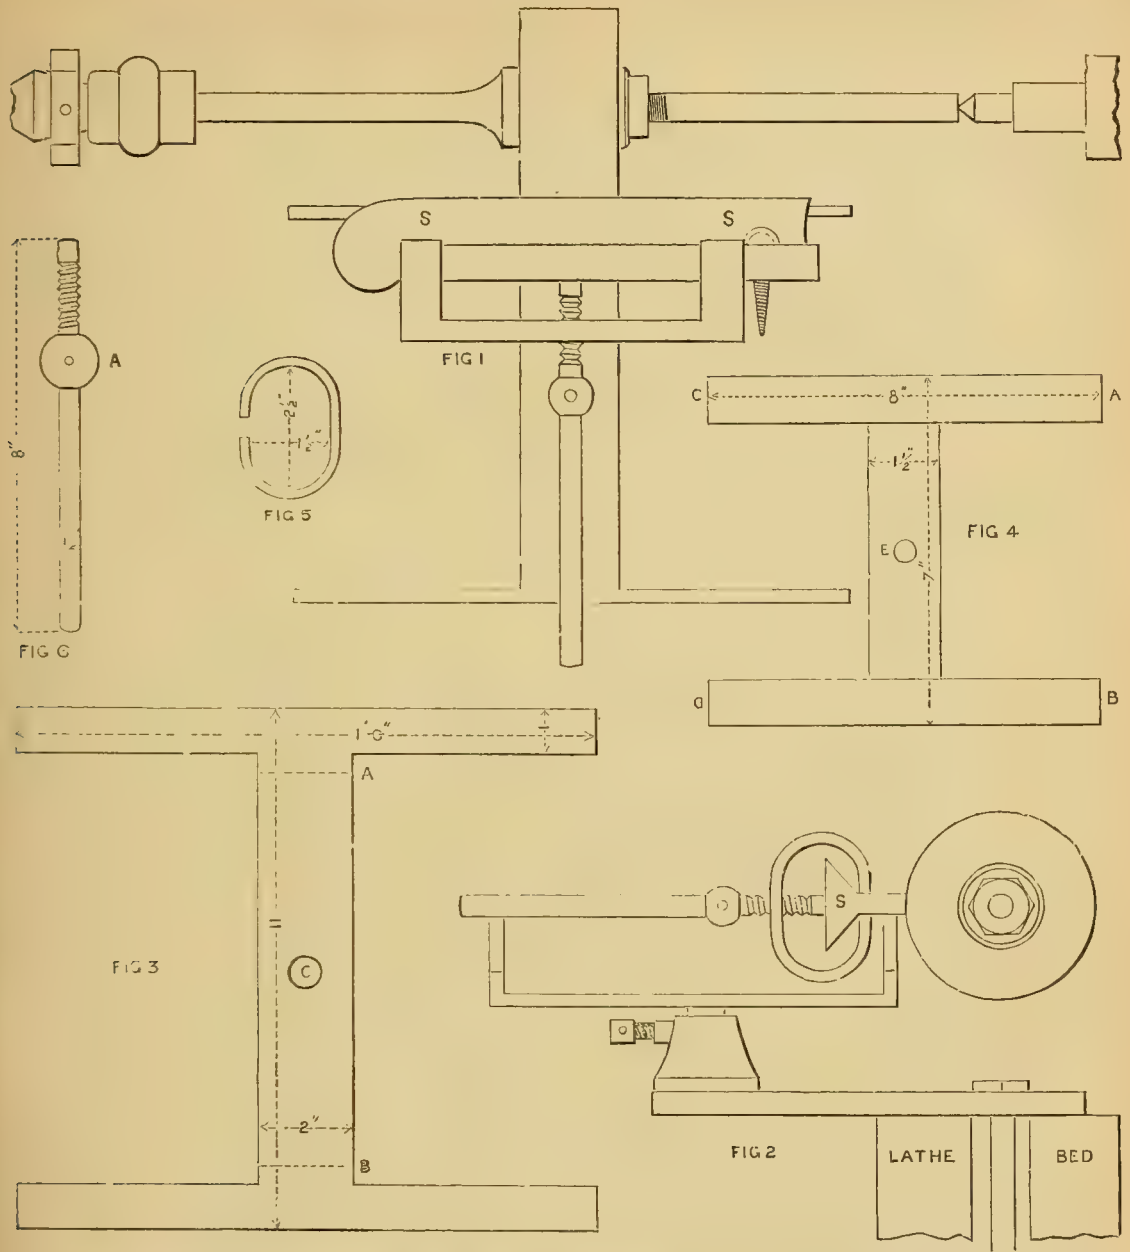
MODE OF MOUNTING EMERY WHEEL WITH SKATE, S, IN POSITION FOR GRINDING, SHOWN IN PLAN. FIG. 2.—SKATE ON LATHE IN POSITION FOR GRINDING, IN SIDE ELEVATION. FIG. 3.—4-PIECE OF IRON FORMING REST. FIG. 4.—H-PIECE TO FORM SKATE-HOLDER. FIG. 5.—FORM IN WHICH ARMS OF SKATE-HOLDER MUST BE BENT. FIG. 6.—LONG-ARMED SCREW TO FIX SKATE IN SKATE-HOLDER.
